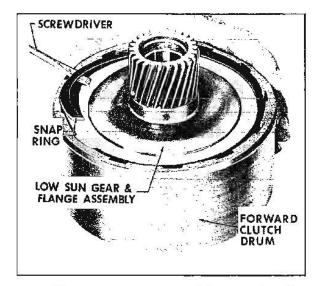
Removing Low Sun Gear and Flange Assy Snap Ring
